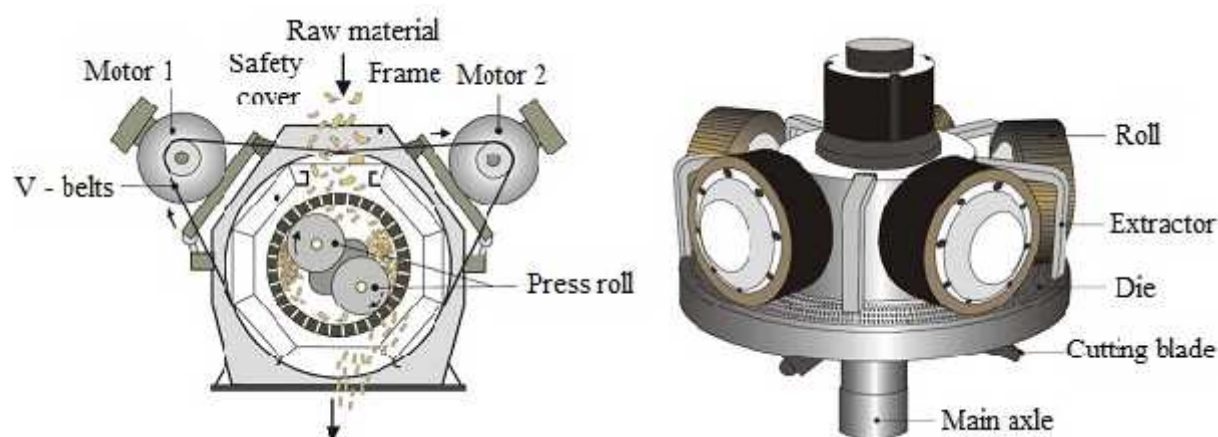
Typical pellet mill design a) ring die and b) flat die [16]
